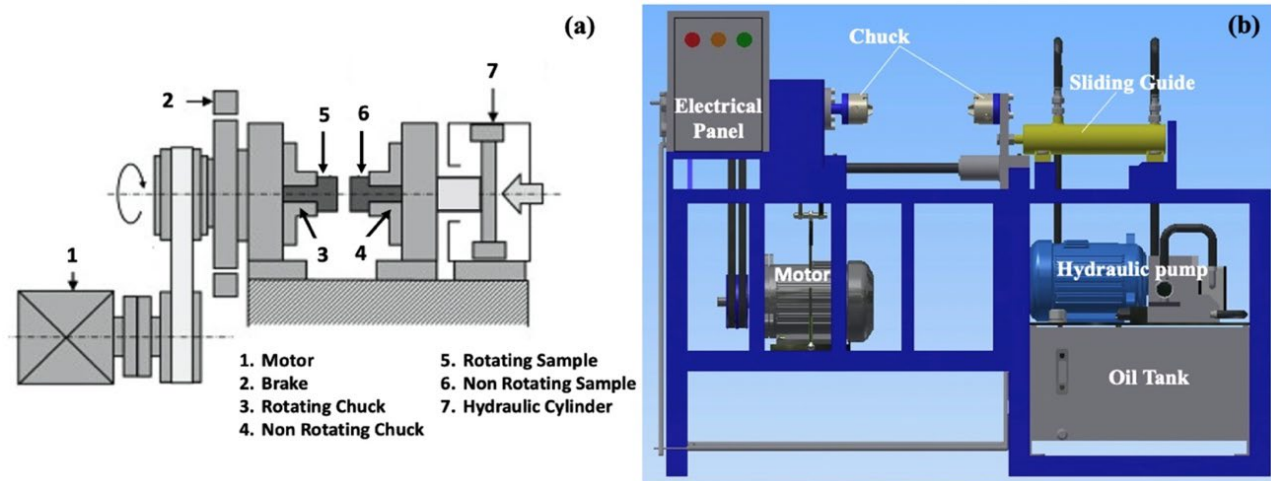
(a) Schematic of continuous-drive friction welding machine, and (b) assembly of friction welded machine used in the present study.
